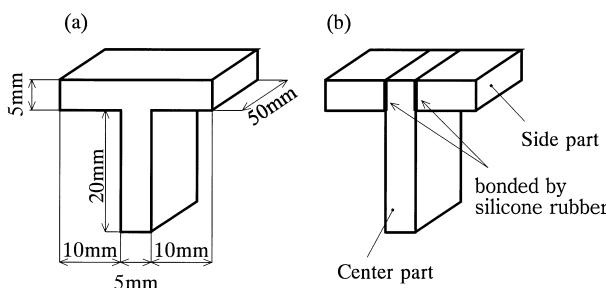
T-shaped gypsum molds having a single part (a) and three parts (b).
